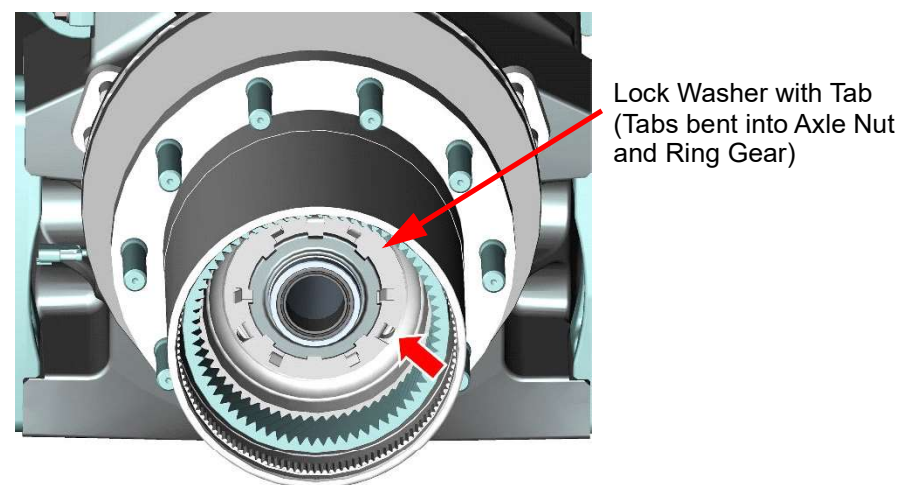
Bending Tabs on Axle Nut Lock Washer
